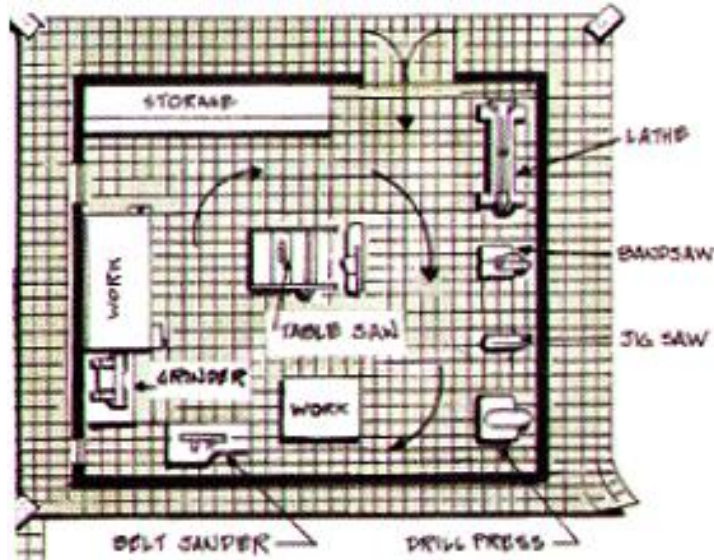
TYPICAL WOOD WORKSHOP LAYOUT (Woodskills, n.d.)
